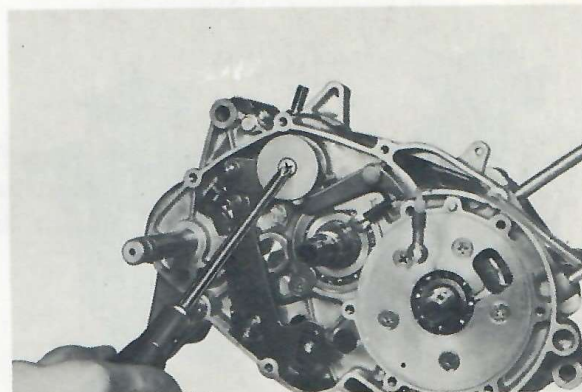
Loosening gear shifting cam pin retainer fitting screw
